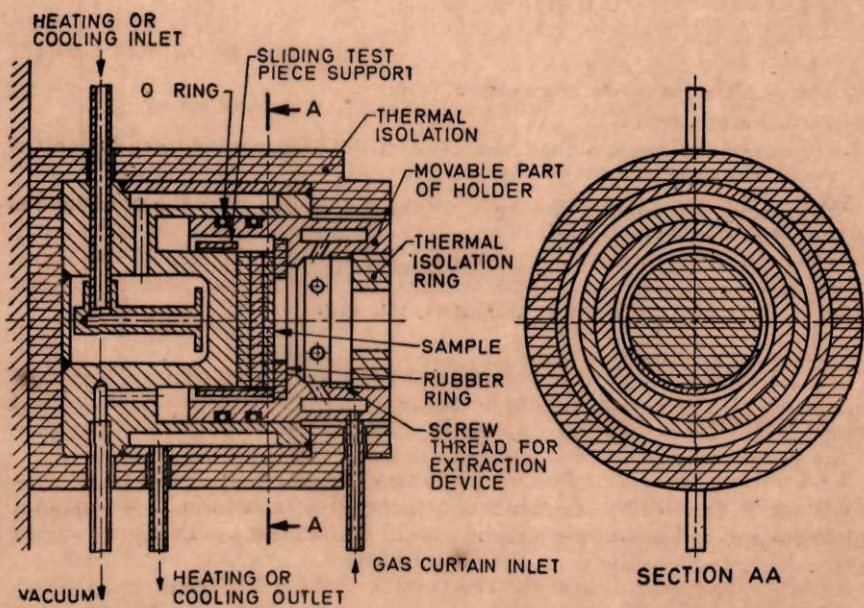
SUCTION HOLDER FOR COMPOSED TEST PIECE
